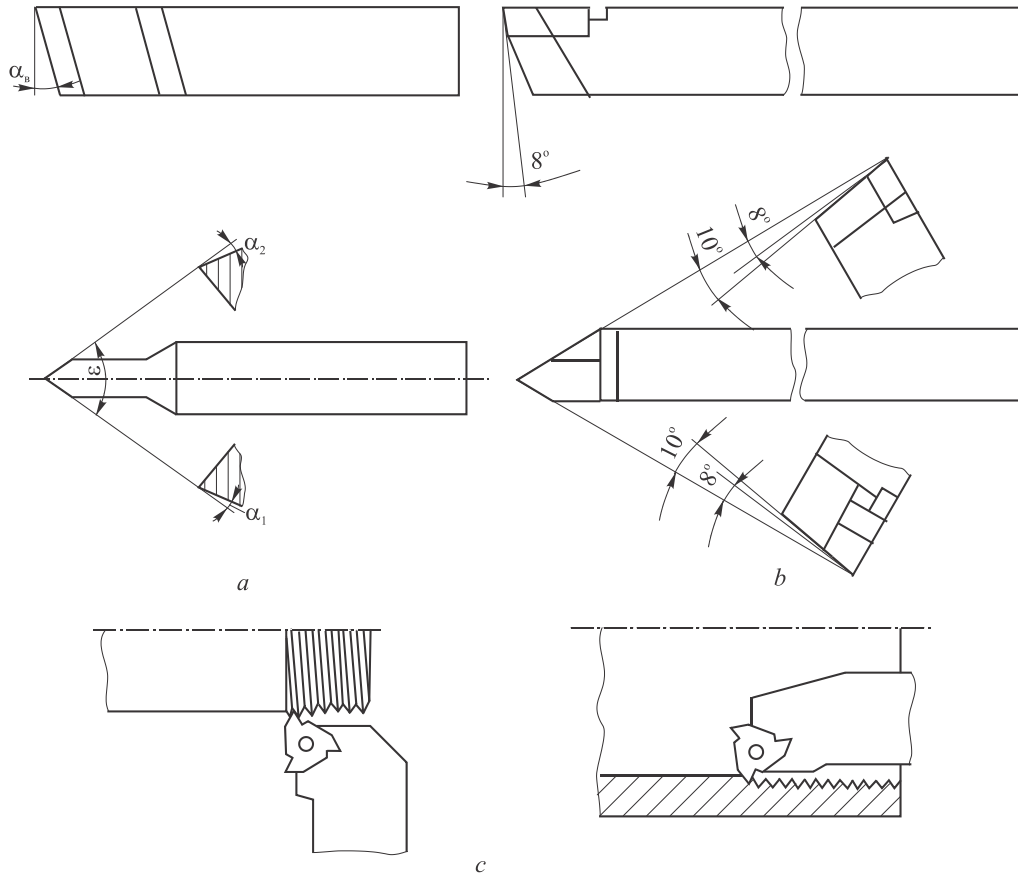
Radial thread cutters: (a) HSS; (b) carbide inserted; (c) indexable carbide
